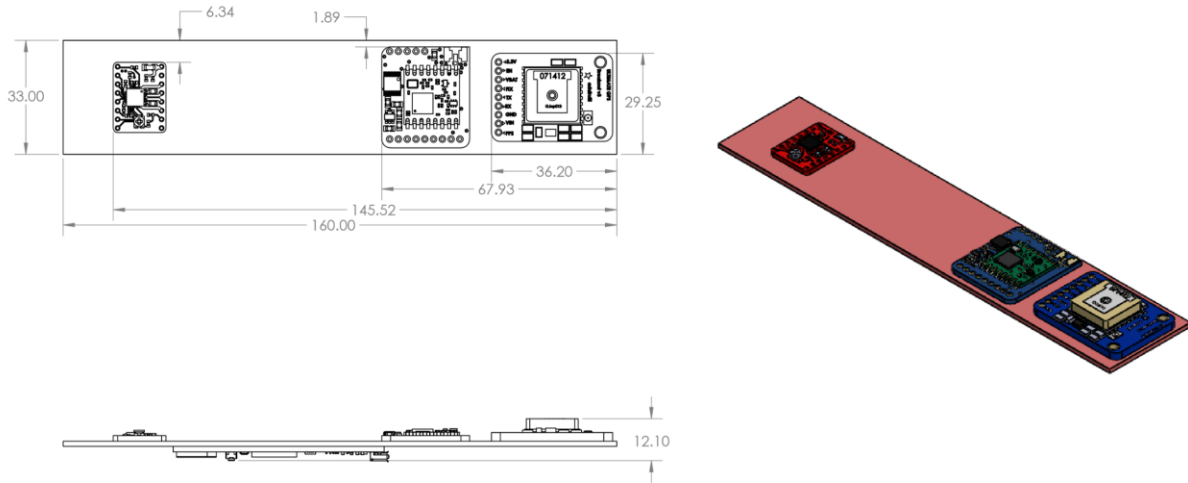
CAD model of the PCB integrating the GPS module, the transceiver module, and the stepper motor driver with the flight computer. Units in millimeters.
